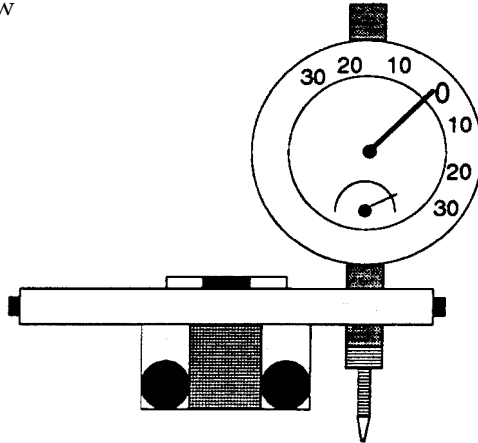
Set the Dial Gauge to the Dial Gauge Base
